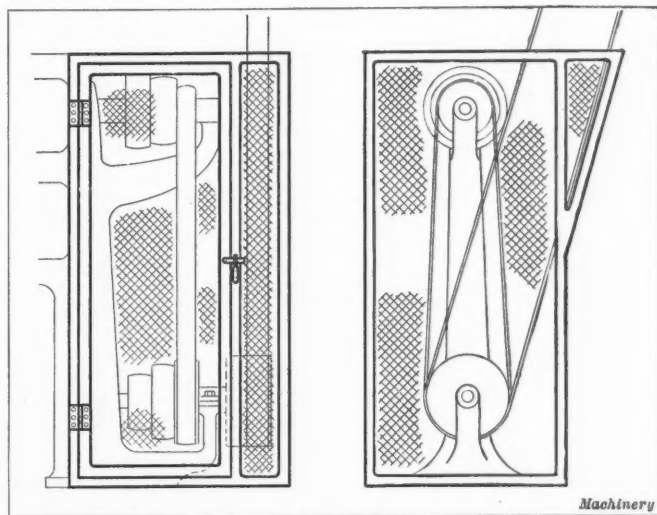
Guard for the Driving Pulleys of a Vertical Drilling Machine
